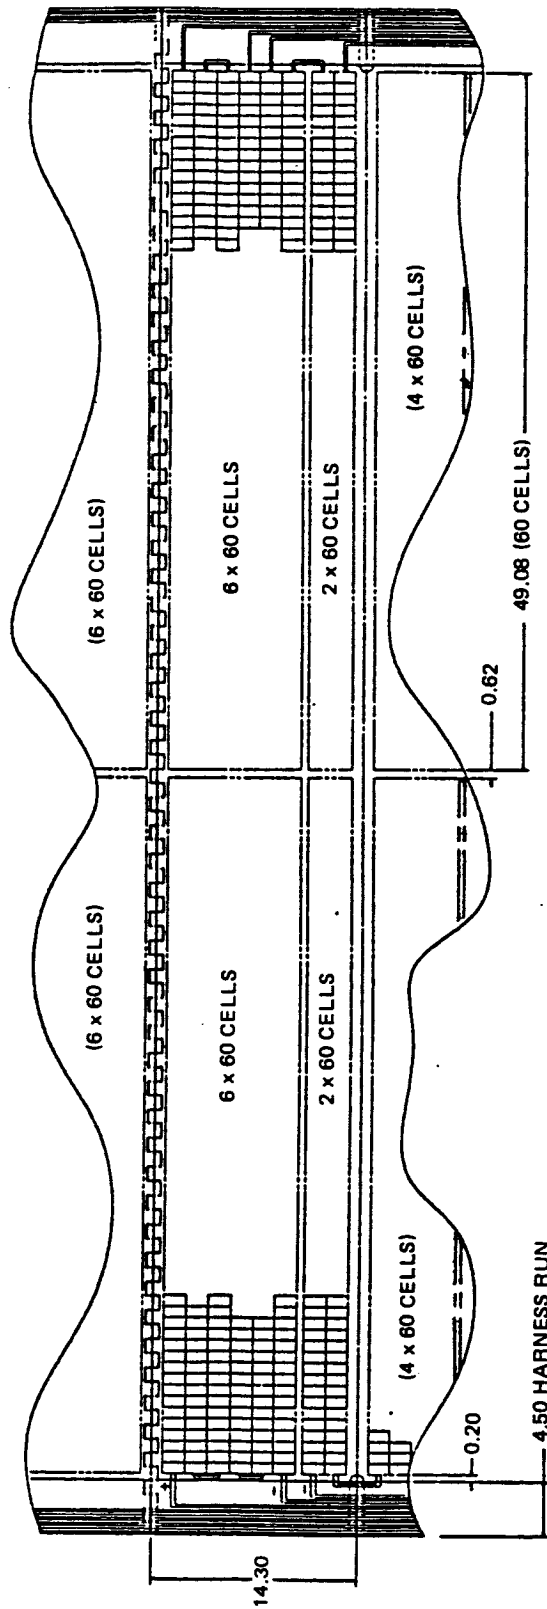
Typical Solar Panel Showing Layout of Solar Cell Modules and Electrical Harness (dimensions in inches)
